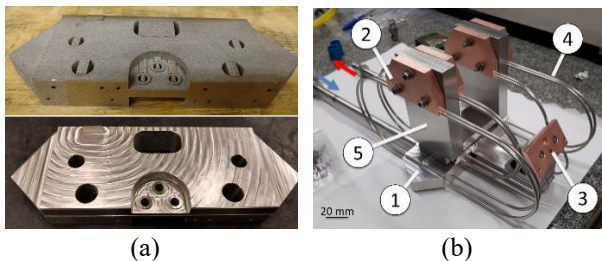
(a) 3D-printed manifold as sintered (top) and after finishing machining. (b) Assembly mounted to brazing tooling: manifold (1), cooling block (2) (x4), manifold extension (3), distribution tubes (4) (x18), and tooling (5).
